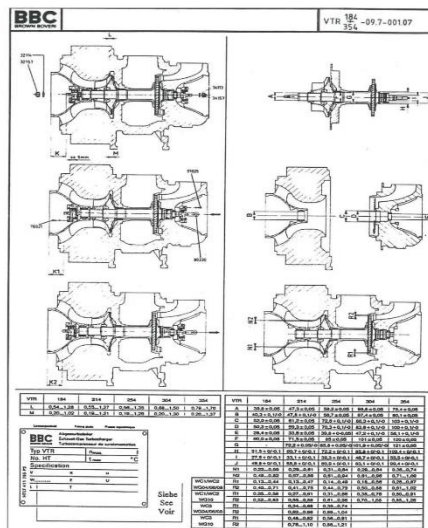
2 Detailed troubleshooting (Source: Private Document)
